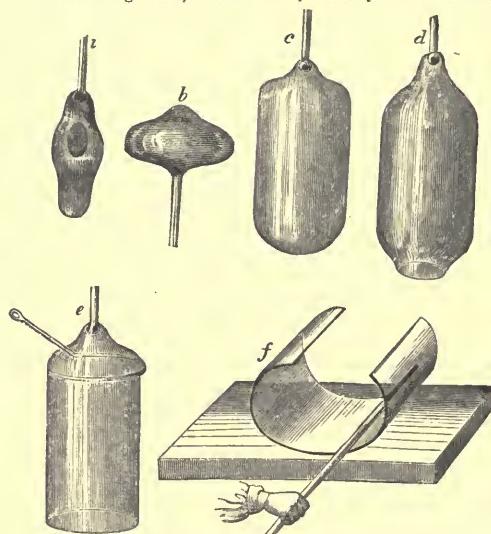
DIFFERENT STAGES IN SHEET-Glass MAKING.
